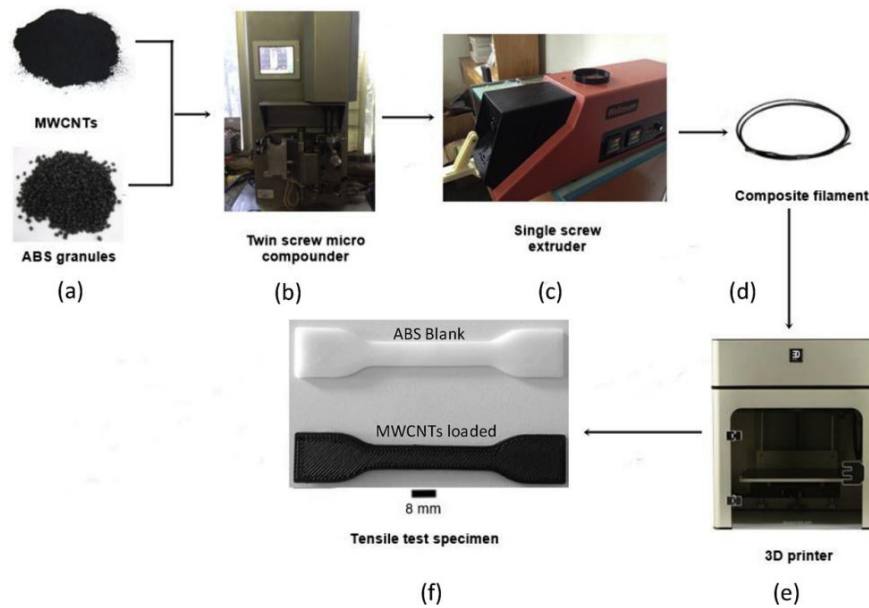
Nano composite structure fabrication process. (a) – raw materials, (b) – micro compounder, (c) – screw extruder, (d) – extruded filament, (e) – 3D printer, (f) – printed specimens [11]
